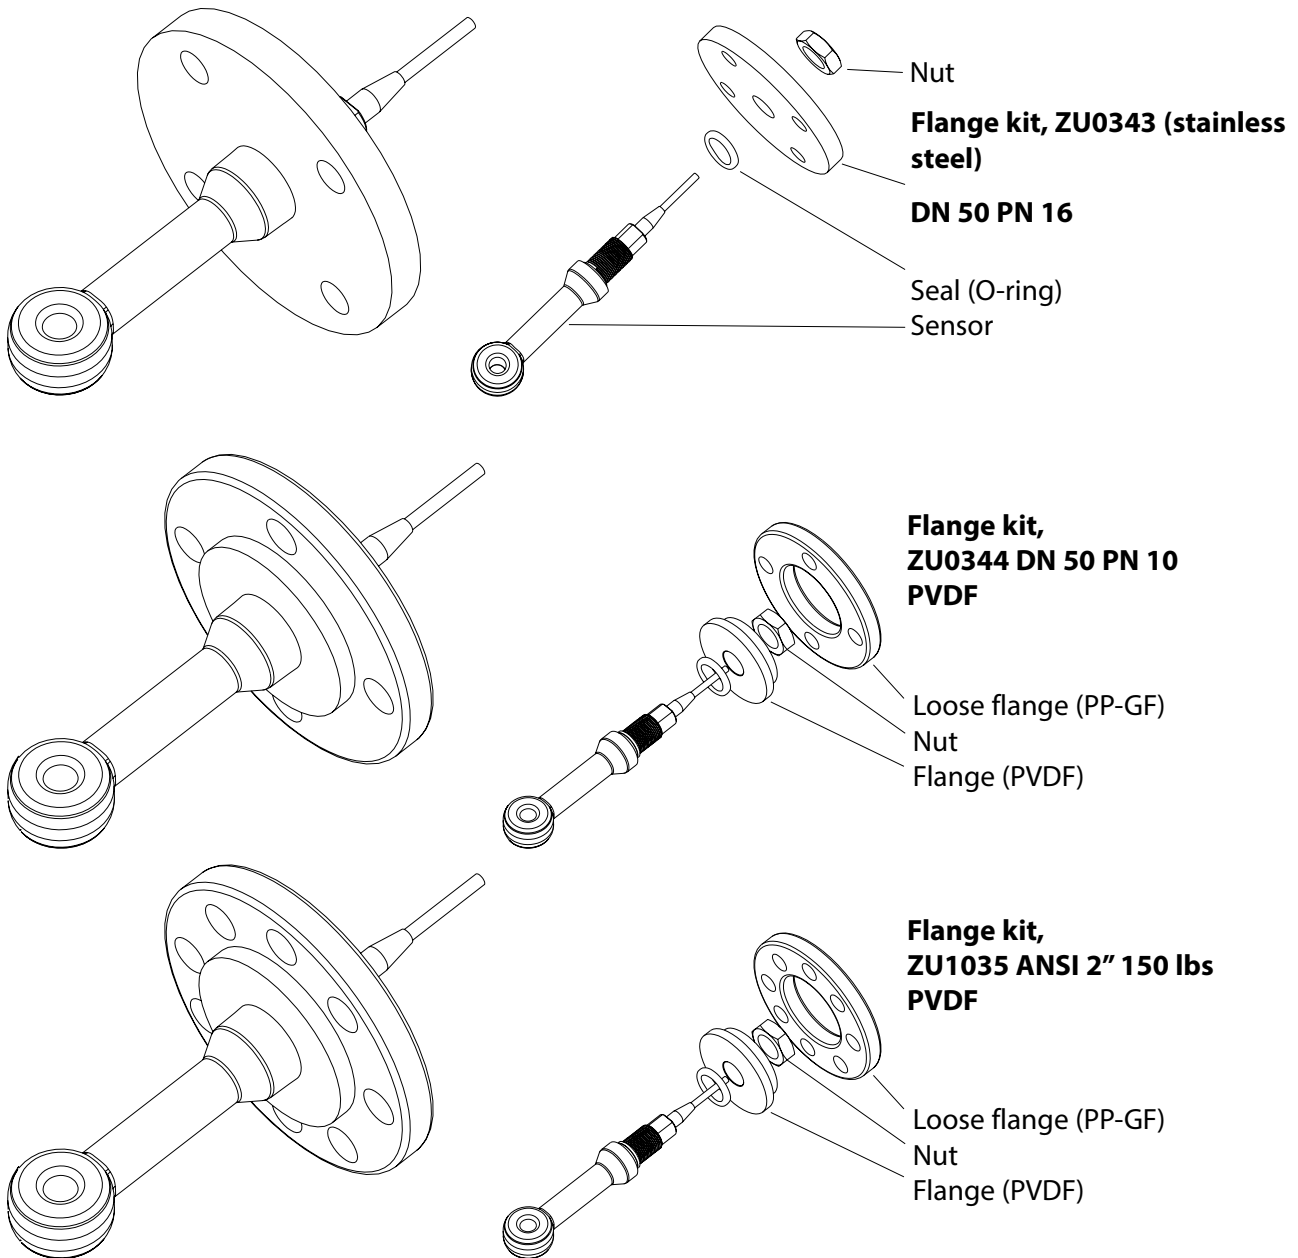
Assembly with DN 50, ANSI 2" loose flange
